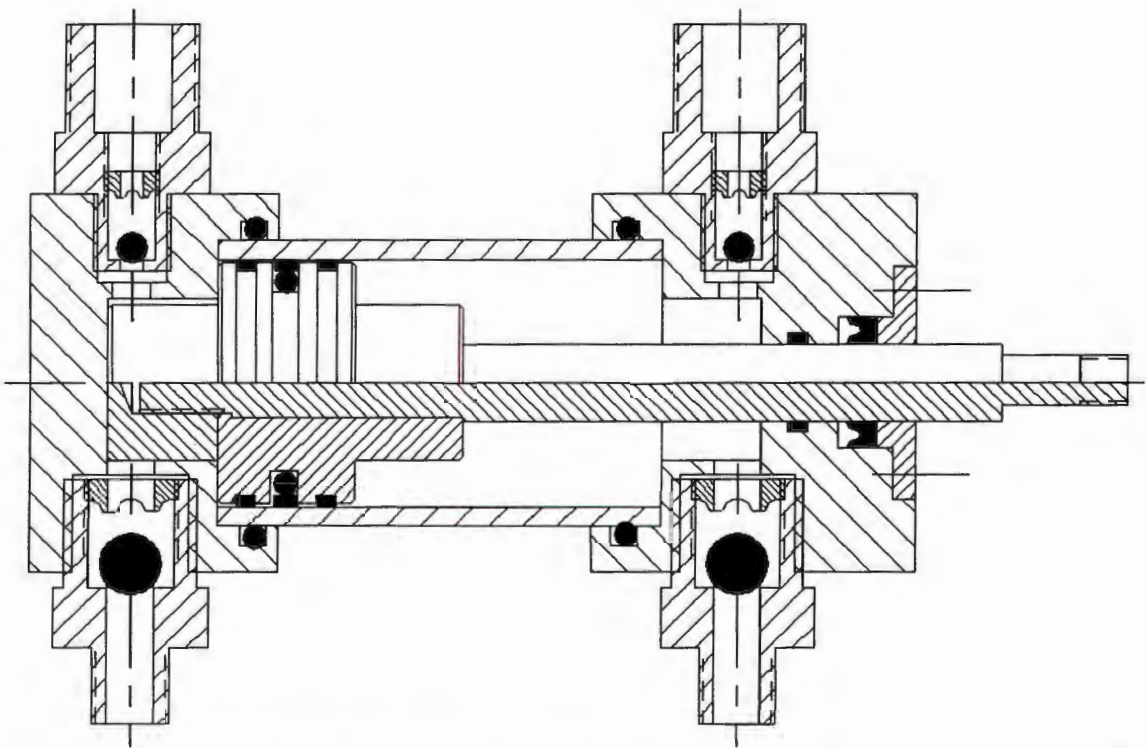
Section View of the Double Action Reciprocating Piston Solution Pump
